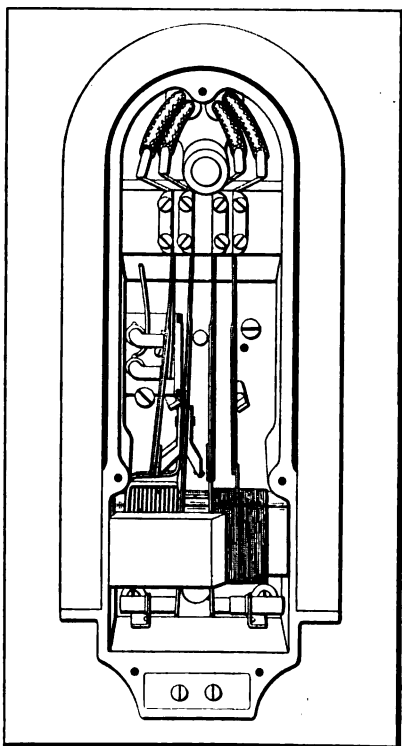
Esterline automatic controller with cover plate removed, showing coils and method of supporting them
